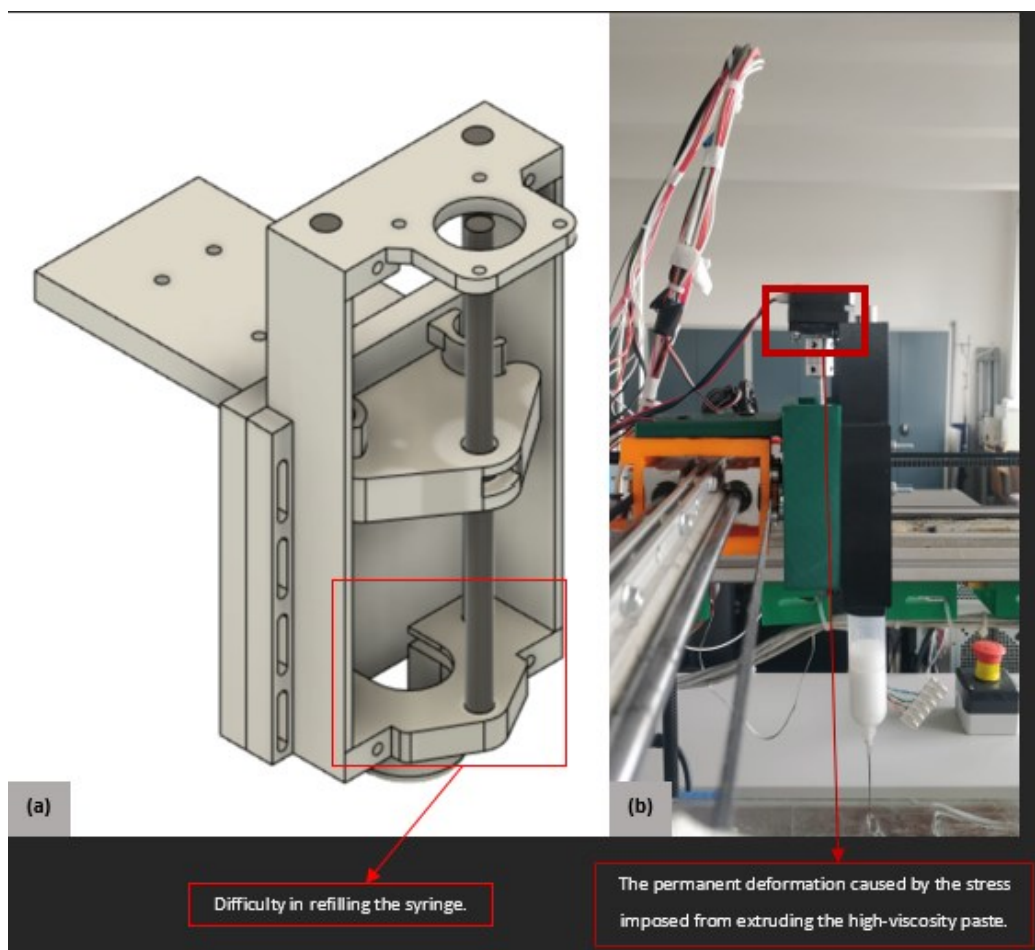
1st Design Iteration: (a). The Full Assembly of the Extruder on Fusion360, (b) Testing the Extruder on CTU FME Lab 3D Printer
